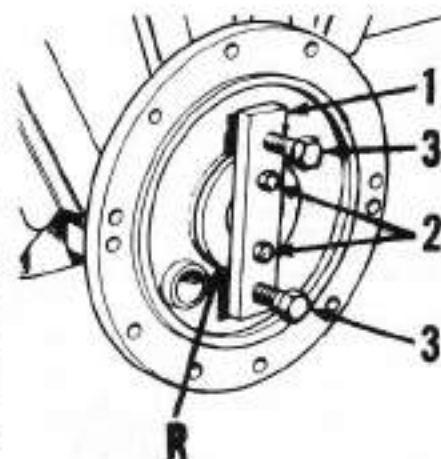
Puller (1) for oil seal retainer (R) can be fabricated locally from flat bar. Top holes for jackscrews (3); attach puller to oil seal retainer with cap screws (2).
